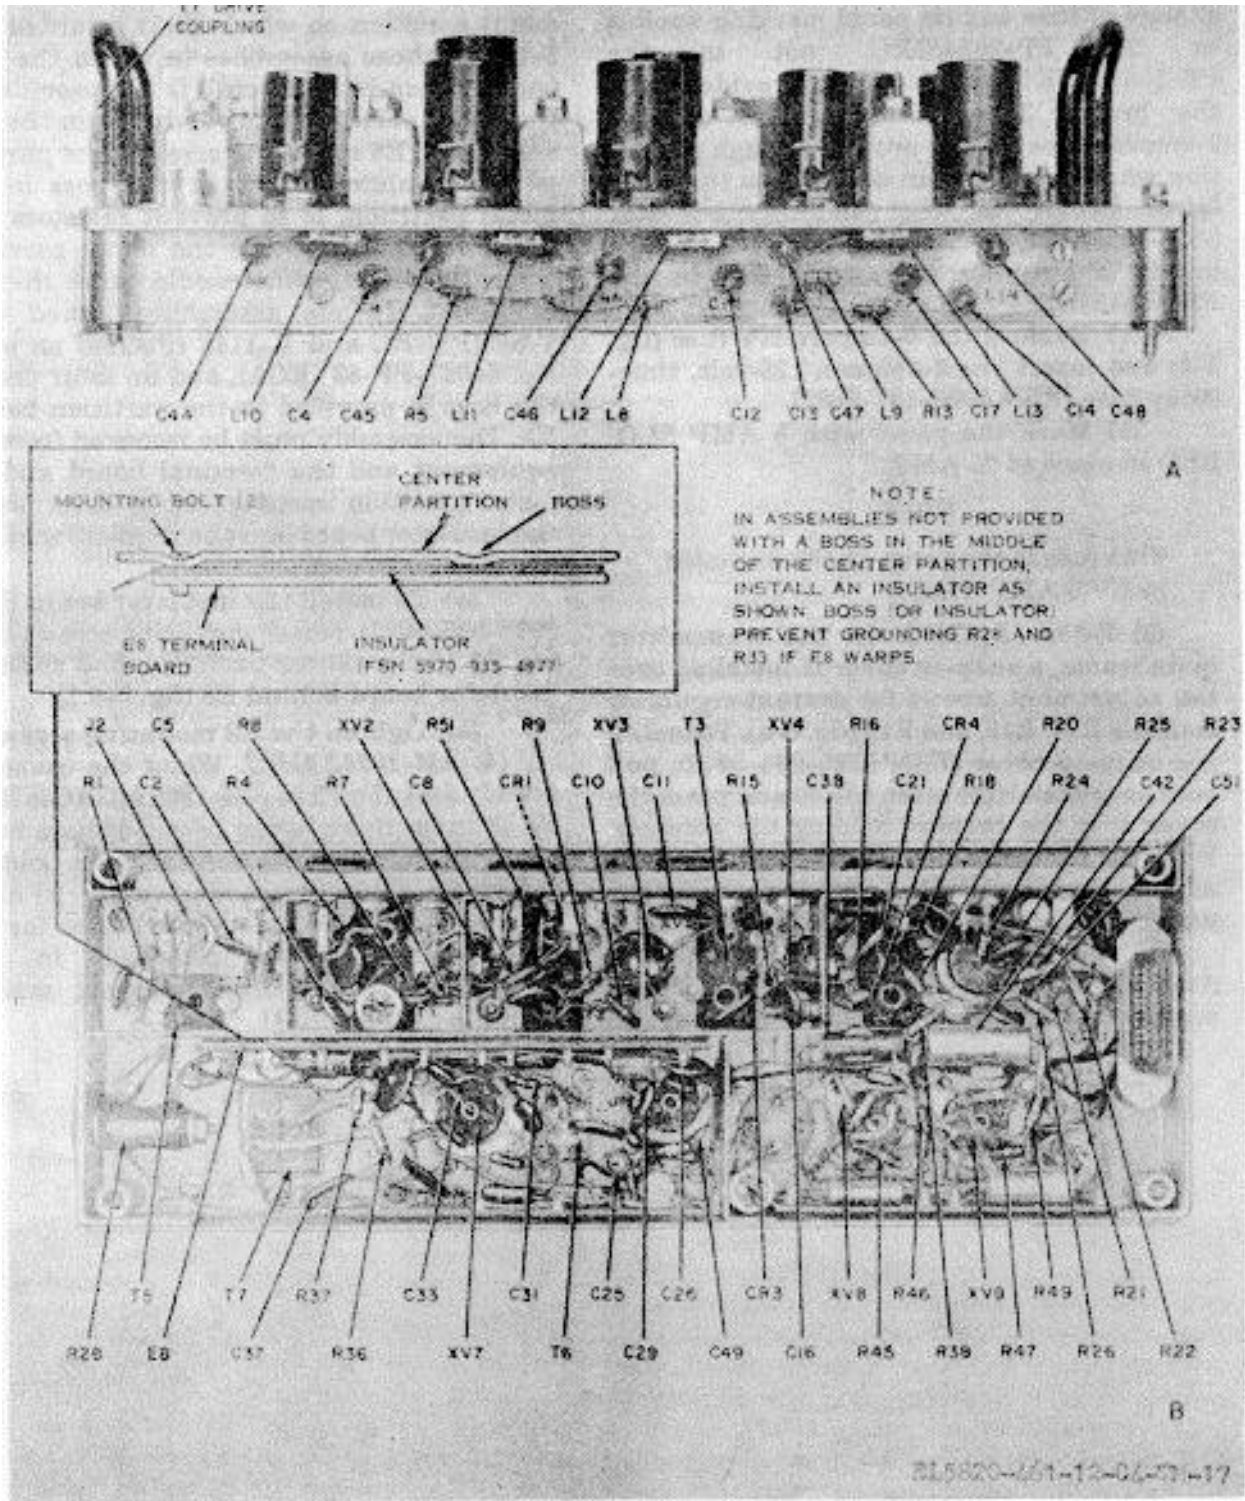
Afc assembly 2A4/3A4, side and bottom views, and details for installing insulator board behind terminal board E8.
